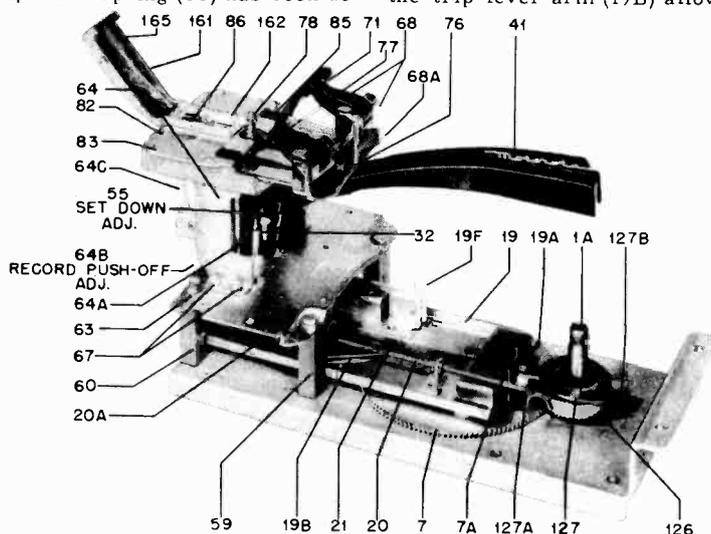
VIEW OF RECORD CHANGER WITH BASE & MOTOR ASSEMBLY REMOVED
